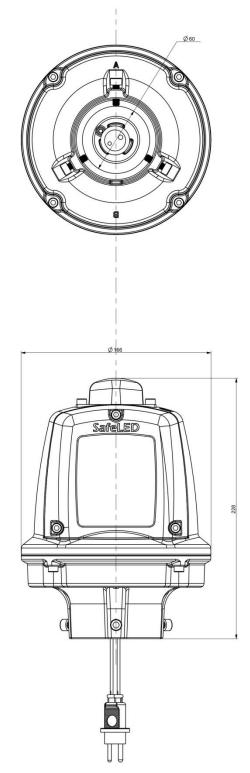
LIGHT FIXTURE DIMENSIONS FOR CIRCULAR GUIDANCE
